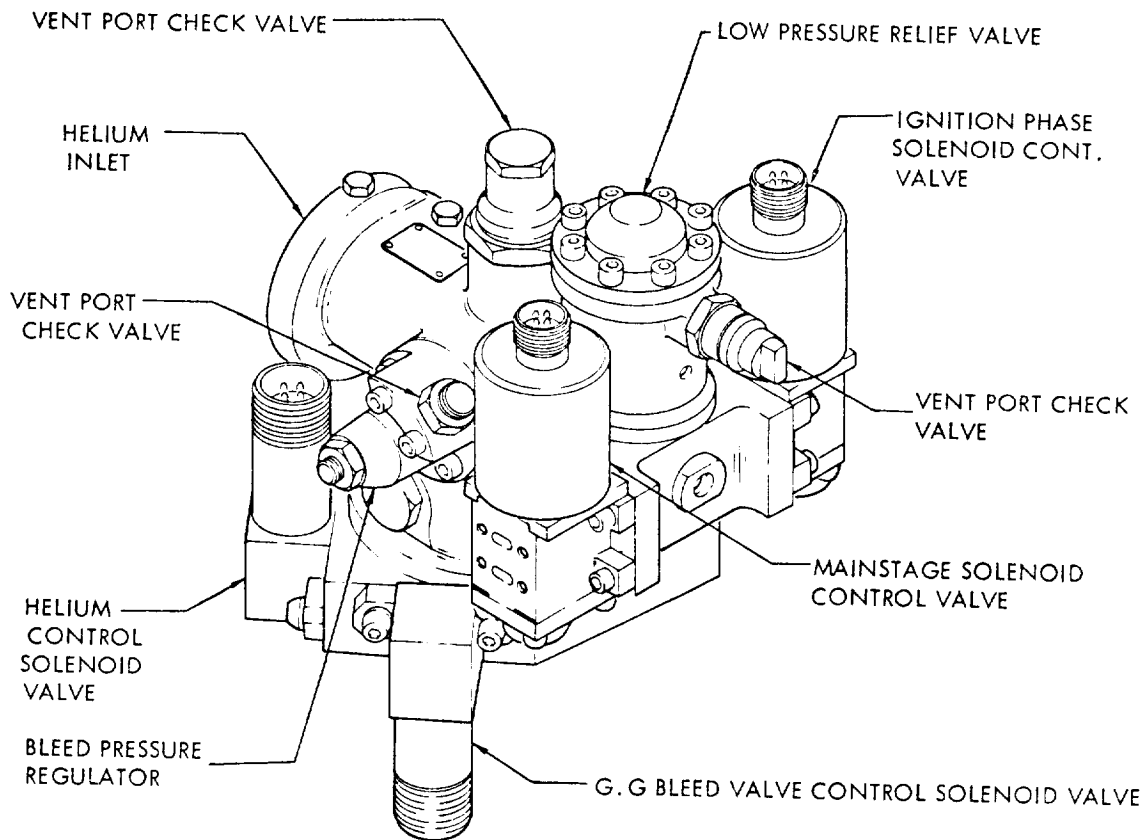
Typical pneumatic control package design used in liquid propellant rocket engine systems.
